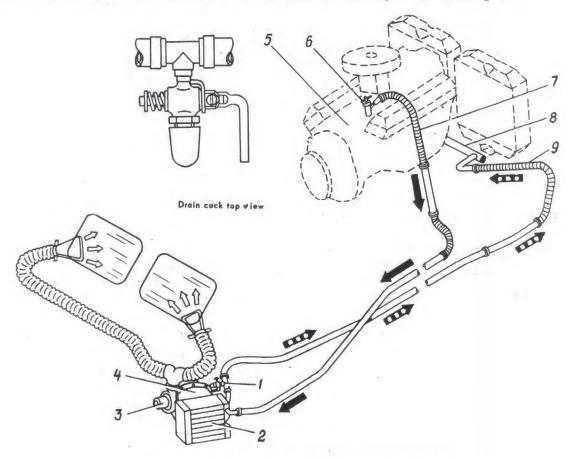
VEHICLE HEATING AND WINDSHIELD DEFROSTER SYSTEM
